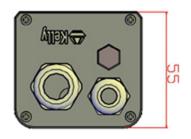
KLS7240S mounting holes' dimensions (dimensions in millimeters)
